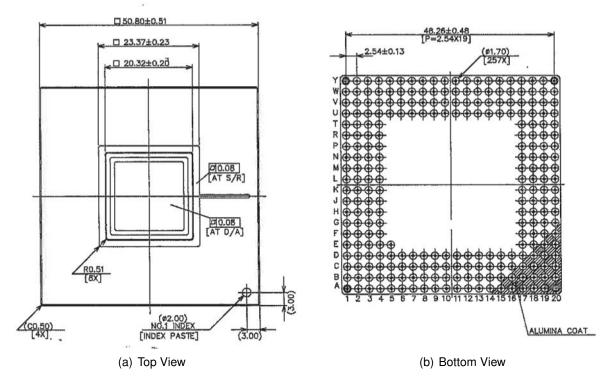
FM ETM PGA package physical dimensions (Units:mm)
